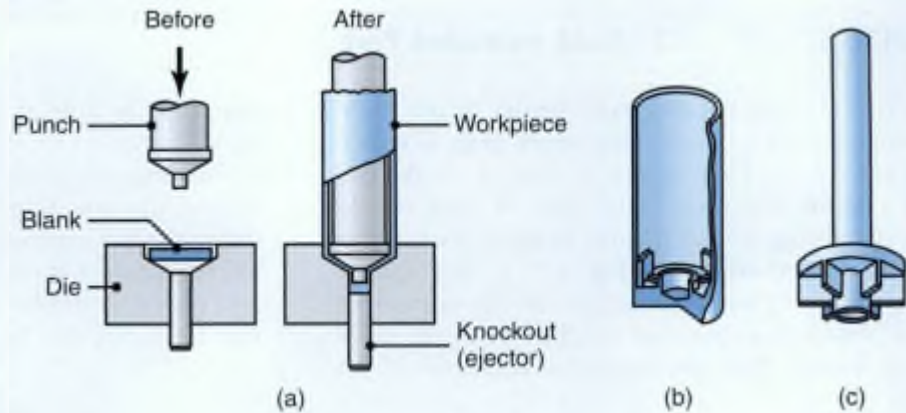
(a) Impact extrusion of a collapsible tube by the *Hooker process*. (b) and (c) Two examples of products made by impact extrusion. These parts also may be made by casting, forging, or machining; the choice depends on the materials part dimensions and wall thickness, and the properties desired. Economic considerations also are important in final process selection.
